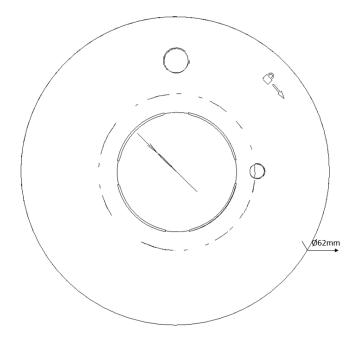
Modbus Gas and TrueVOC Sensor Dimension – Top View
